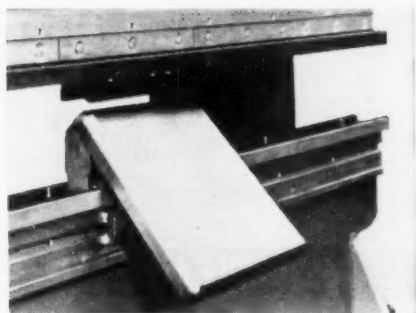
Press Brake equipped with a restrike die for forming side flanges in the ball corners tool-up. This die consists of a set of master ends which can be expanded any desired distance by placing filler blocks between the ends.
